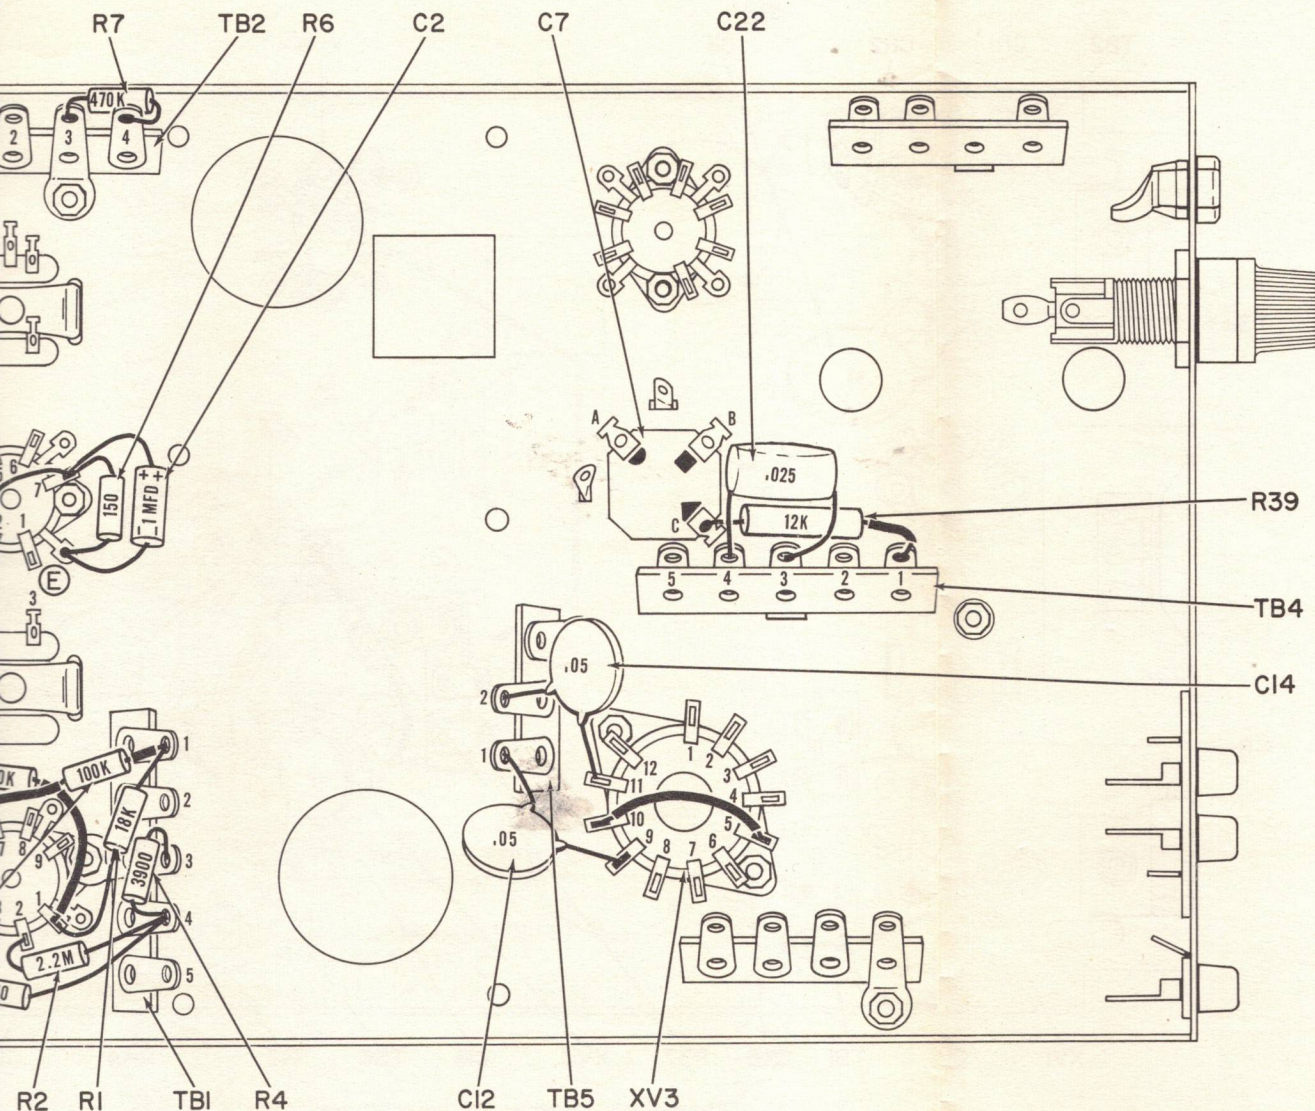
C. Bottom Chassis Wiring (Cont'd.)
